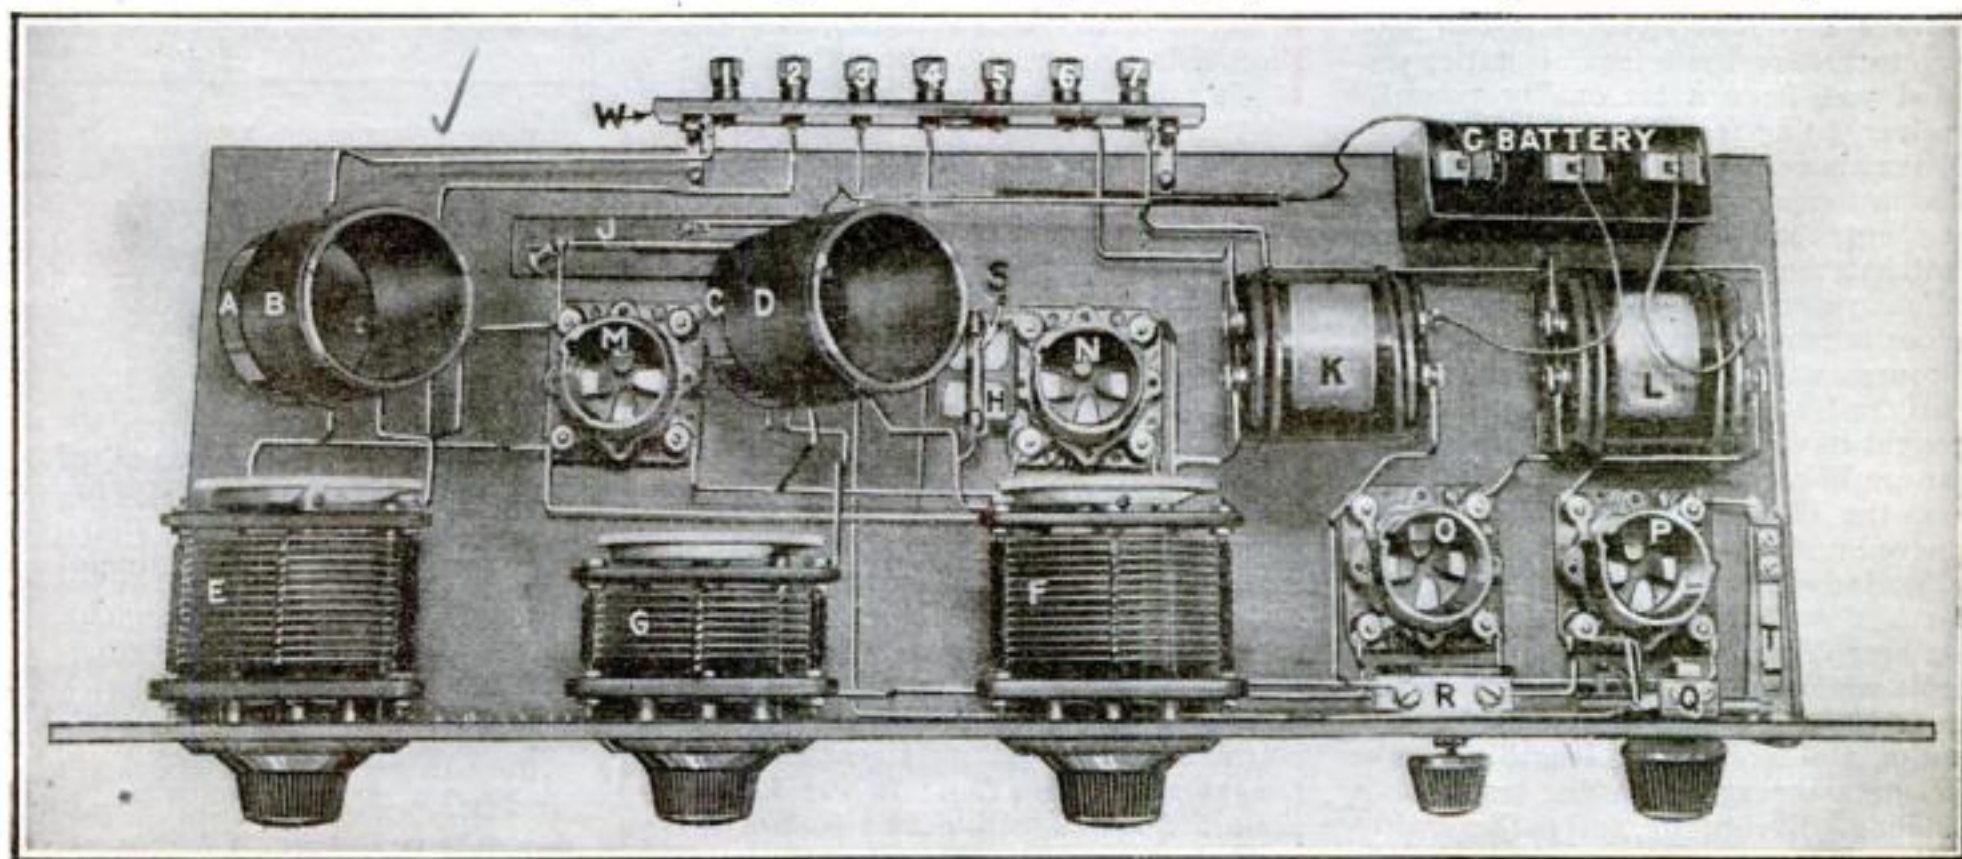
View of the four-tube radio receiver from the top, showing in detail the arrangement of parts and wiring
